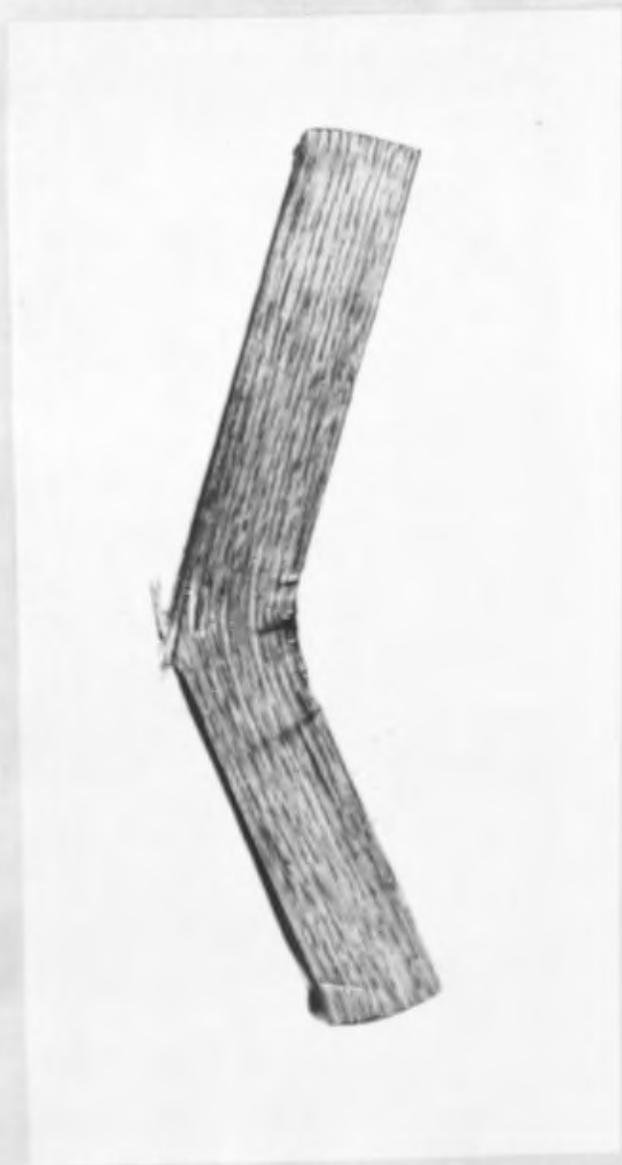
Steamed oak column showing three zones, tension compression and a central neutral zone.
